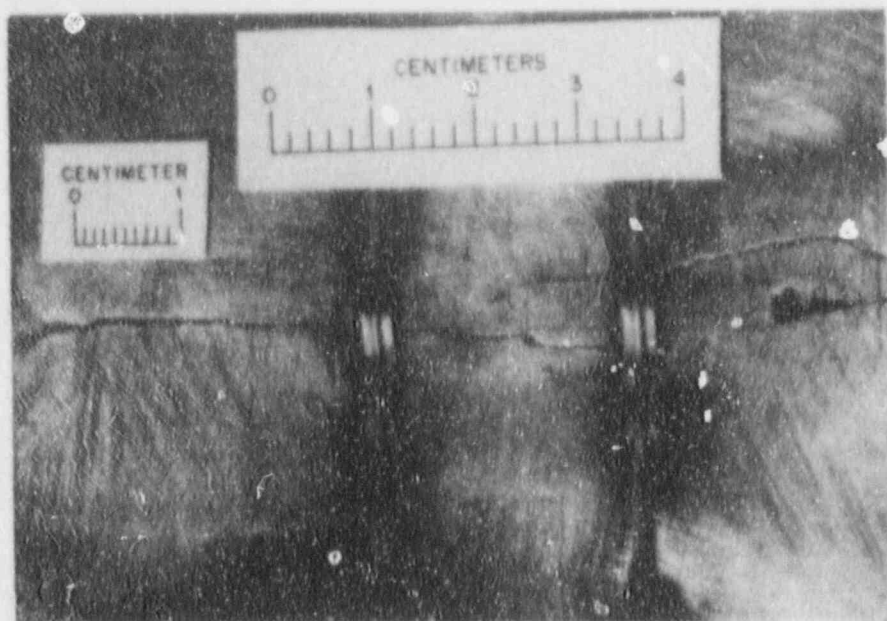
Crack in the heat-affected zone of the electron beam weld on the surface of clad plate CP-17.
